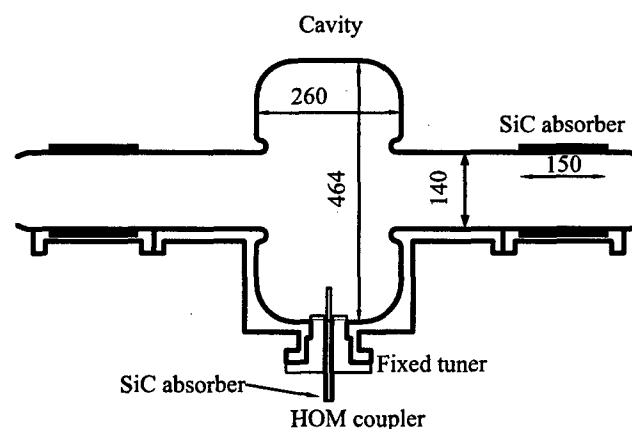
Cross-sectional view of the cavity with the HOM coupler.
